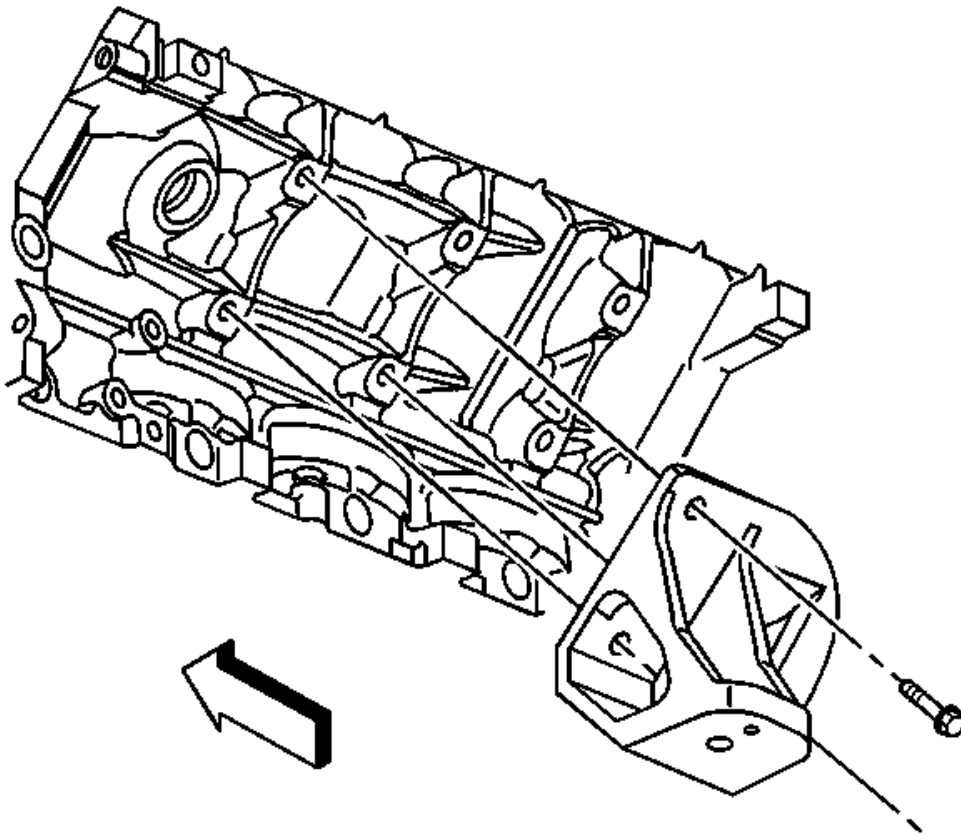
View Of Fuel Rail Covers & Left Engine Mount Bracket
